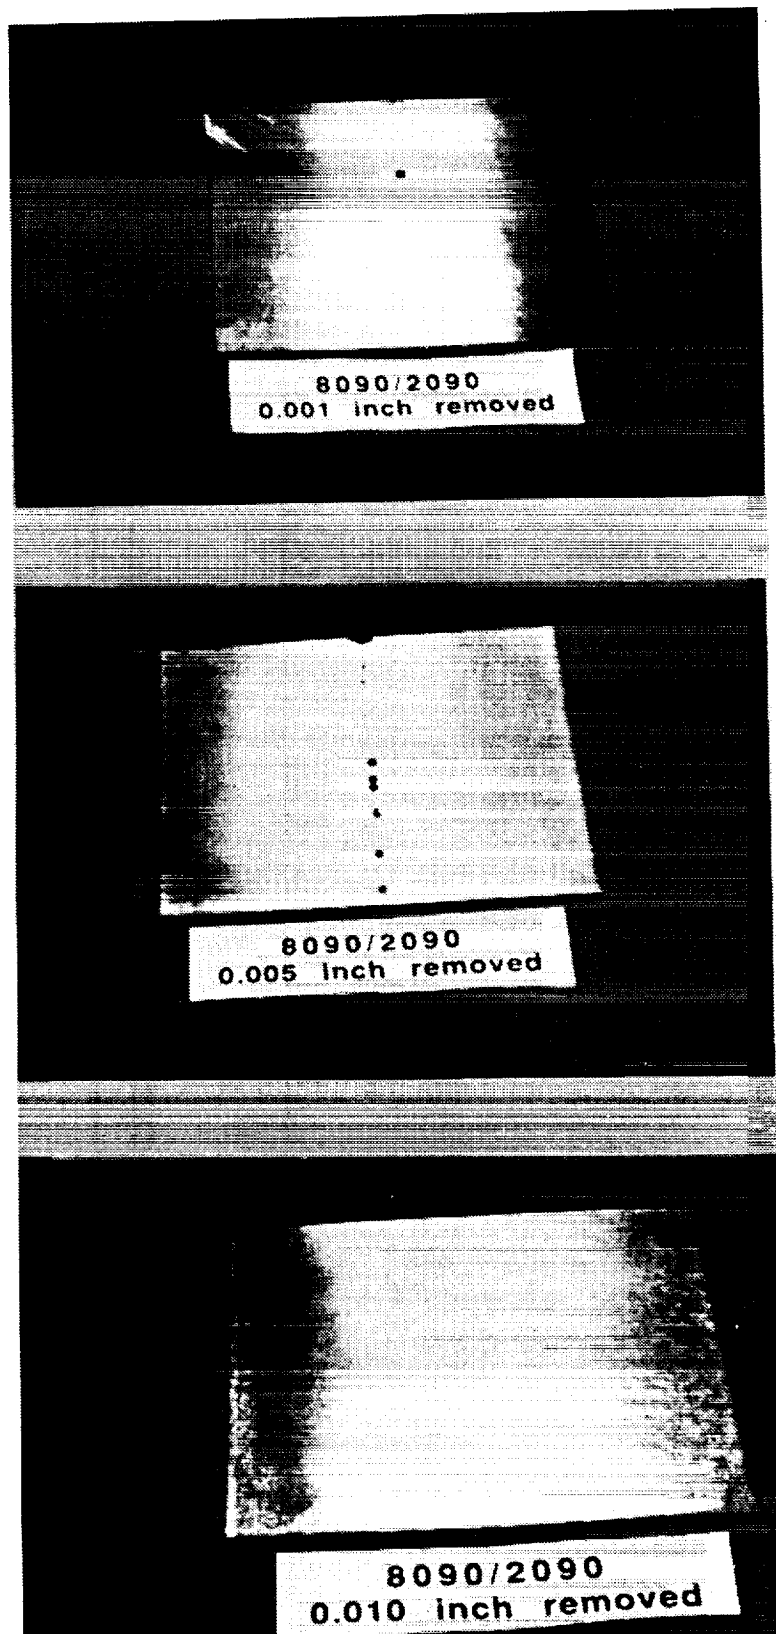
Photographs of 8090-T6 to 2090-T83 Laser Beam Weld Specimens After Dye Penetrant Testing Showing Degree of Porosity at the Interface Associated With Chemical Milling of 0.001, 0.005, and 0.010 Inch (0.02, 0.13, and 0.25 mm) Per Side.
